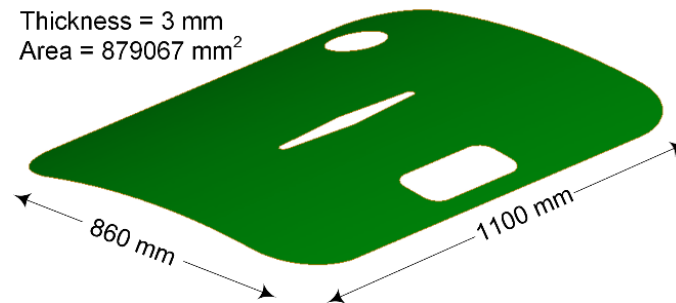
3D view of the CAD model of a non-rigid aluminum panel.
